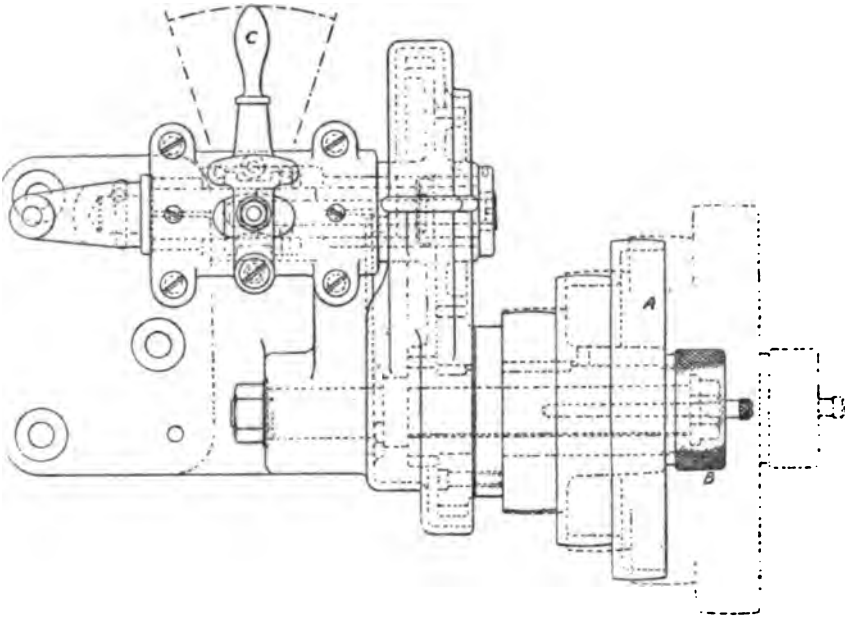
Feed Gear Box. Front Elevation. (Dotted Pulley for larger Machine.)
